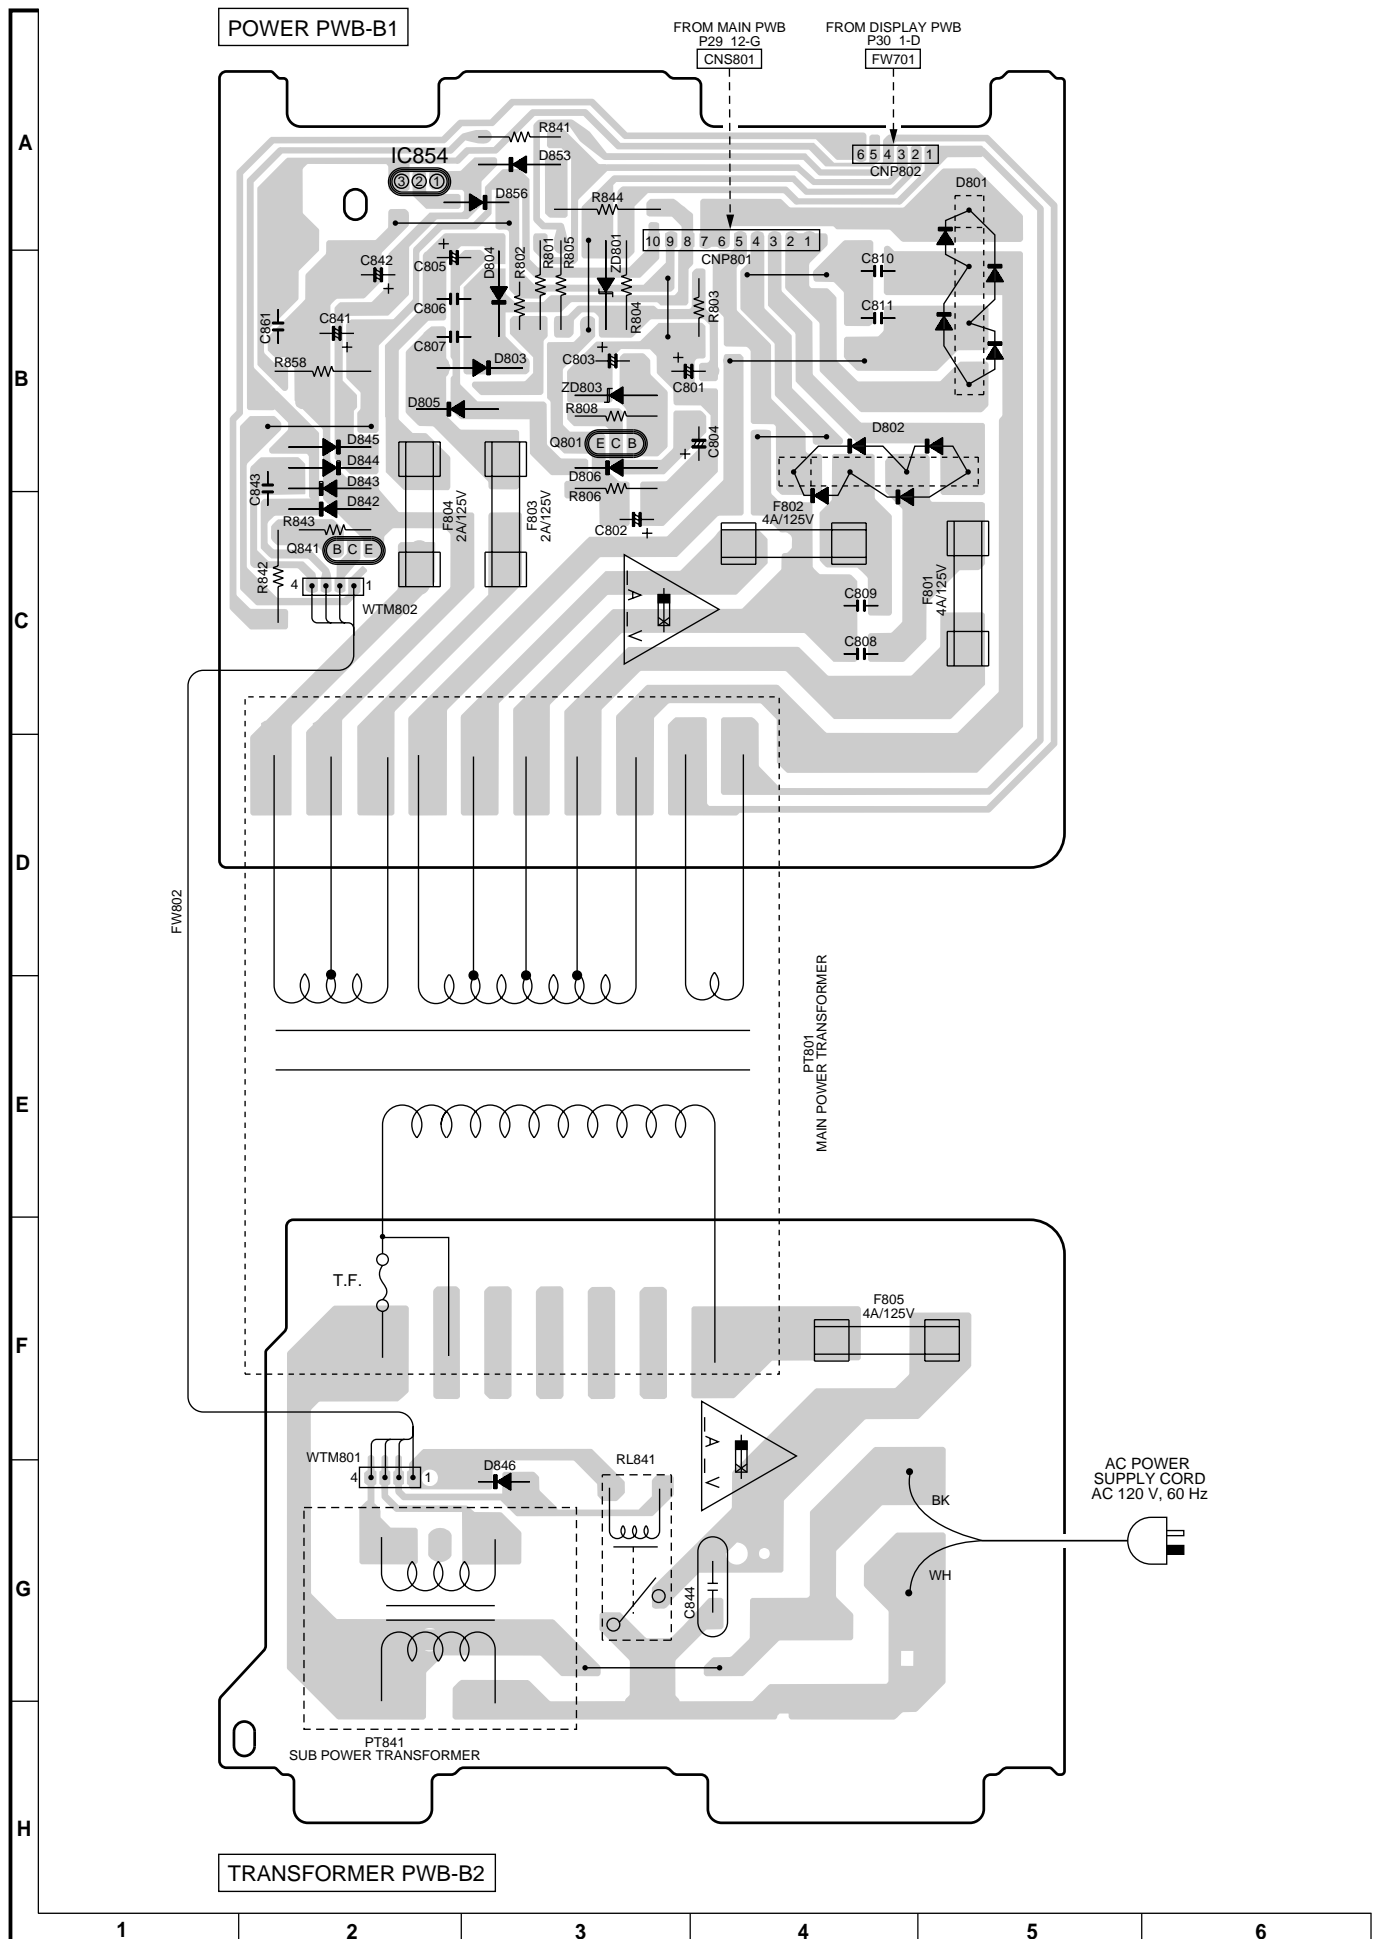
WIRING SIDE OF P.W.BOARD (777)
